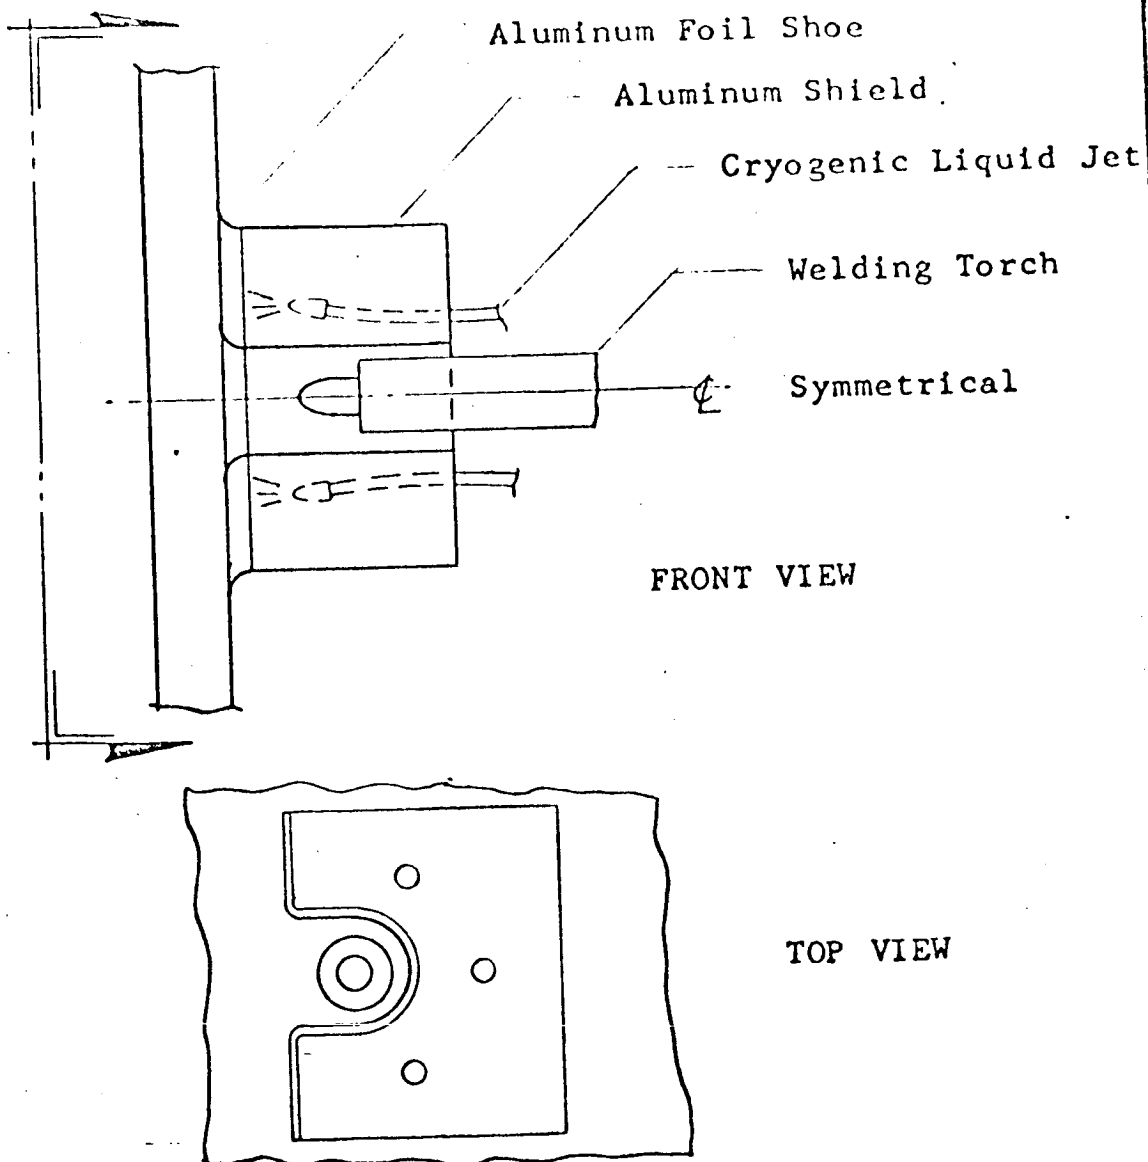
Jet System No. 2 for Front Side Chilling of Weldments using a Cryogenic Liquid — Traveling Shield with Metal Foil Shoe
